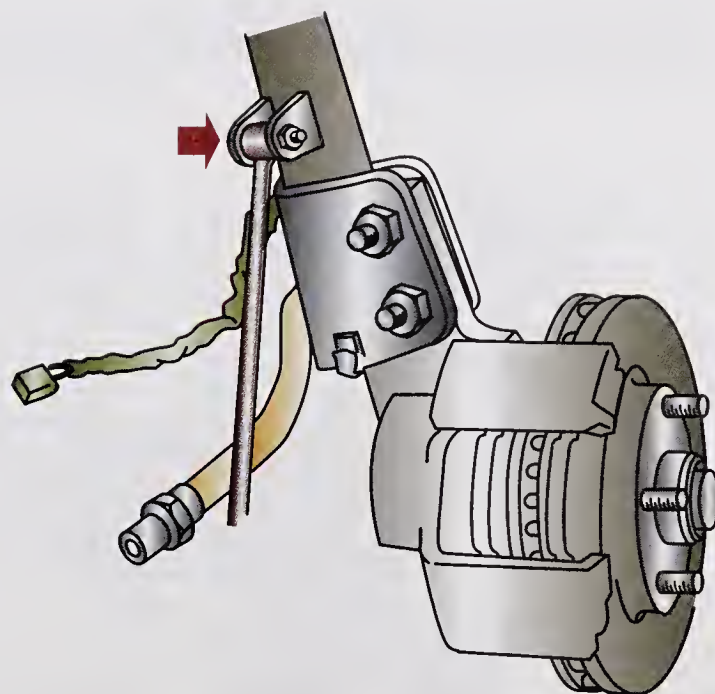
Removing stabilizer bar from the rear strut.
